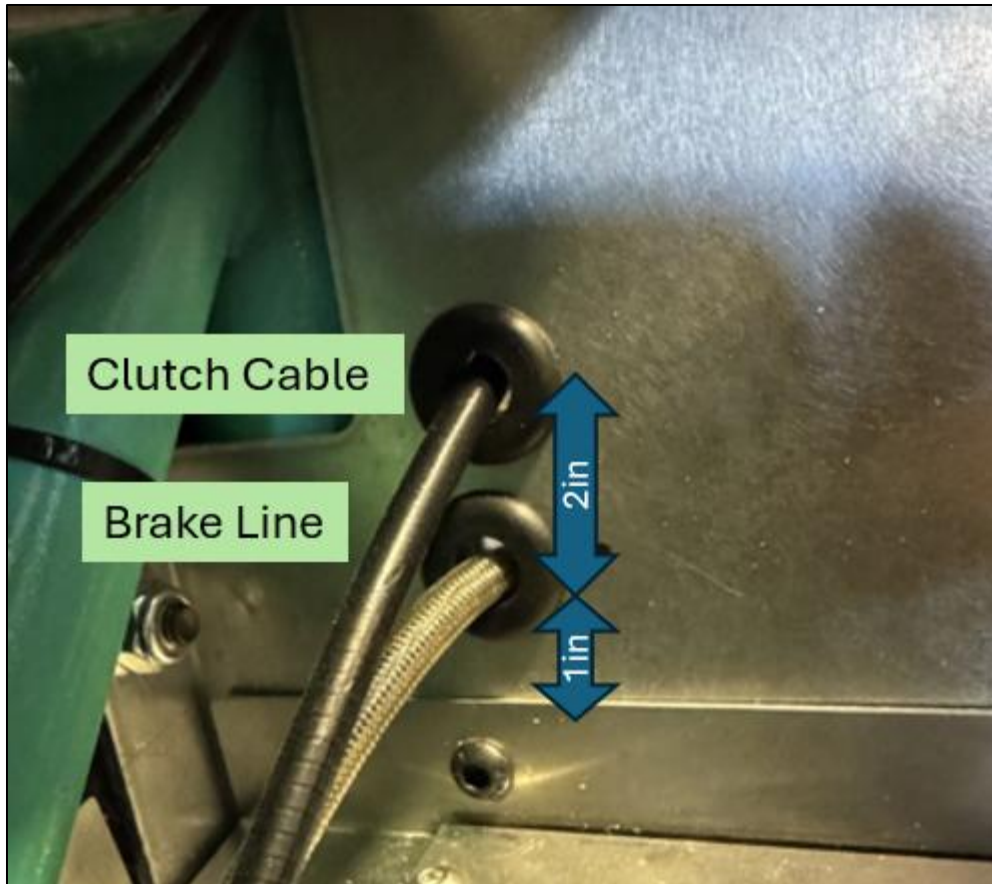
Pass Through Holes for the Clutch and Brake Lines
